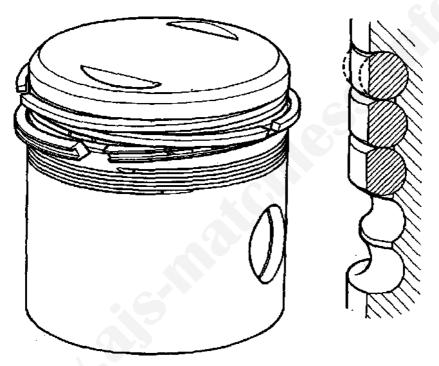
WIREWOUND CLOSE-FITTING PISTON.
